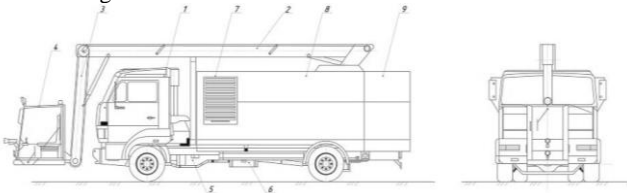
Cantilever type deicing vehicle of travel acting: 1 – vehicle chassis; 2 – main boom; 3 – extension boom; 4 – enclosed operator's cabin; 5 – vehicles transmission; 6 – auxiliary fuel tank; 7 – auxiliary engine vent holes; 8 – spraying system tanks; 9 – boom operating hydraulics.
